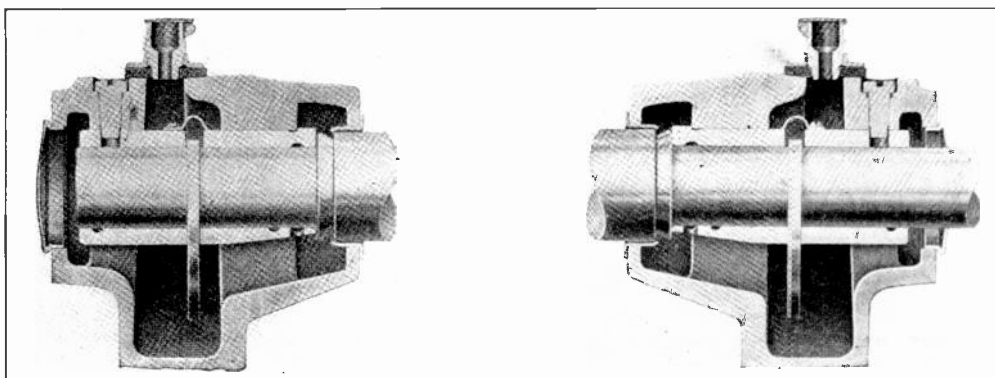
Sectional views of two sleeve bearings, clearly showing the oil wells, oil rings, filler cups, etc.
